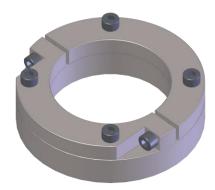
Clamp Ring Assembled and Connected to the Fixing Plate
